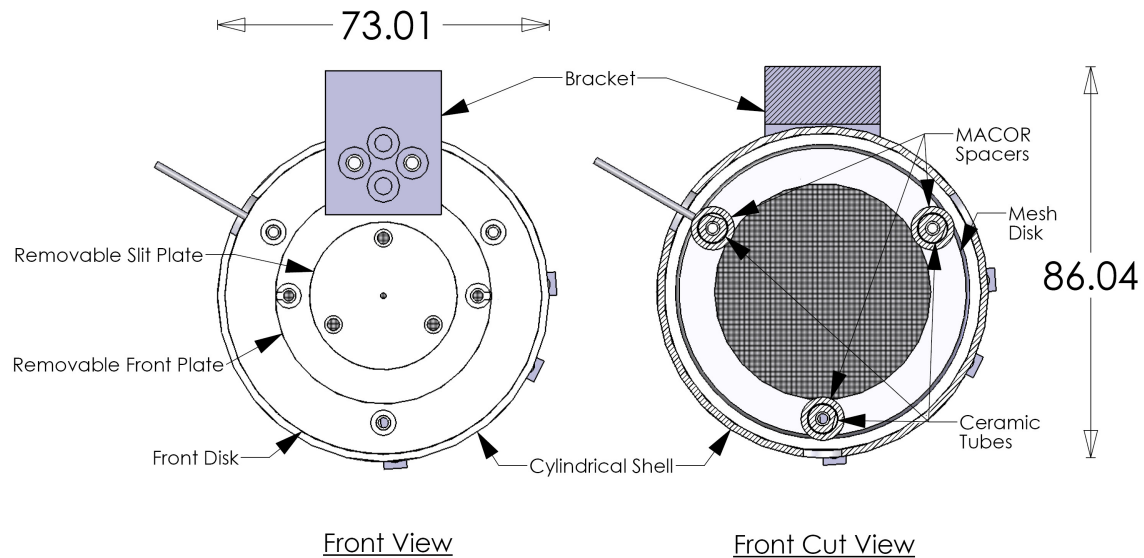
Front view (Left) and front cut view (Right) drawings of the TITAN RFA.
